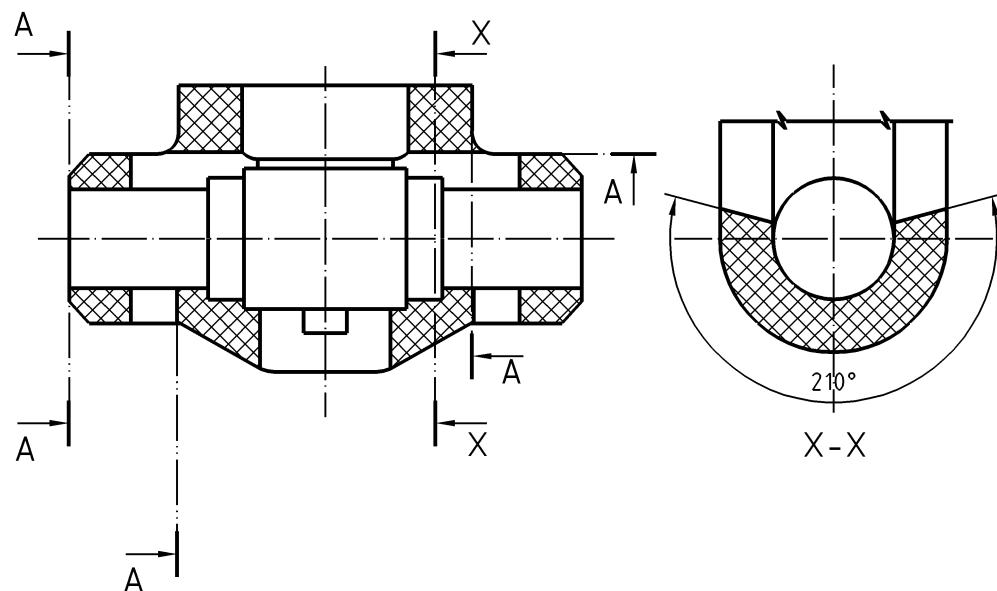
Typical casting section showing required radiographic examination of top-entry ball valve body
